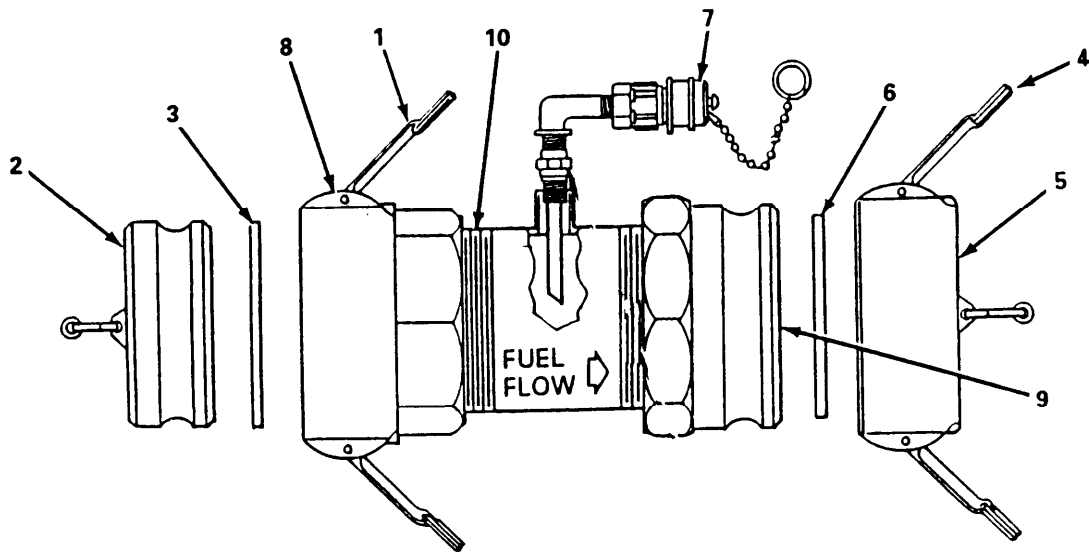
Water Detector Kit Adapter, Disassembly/Assembly.
